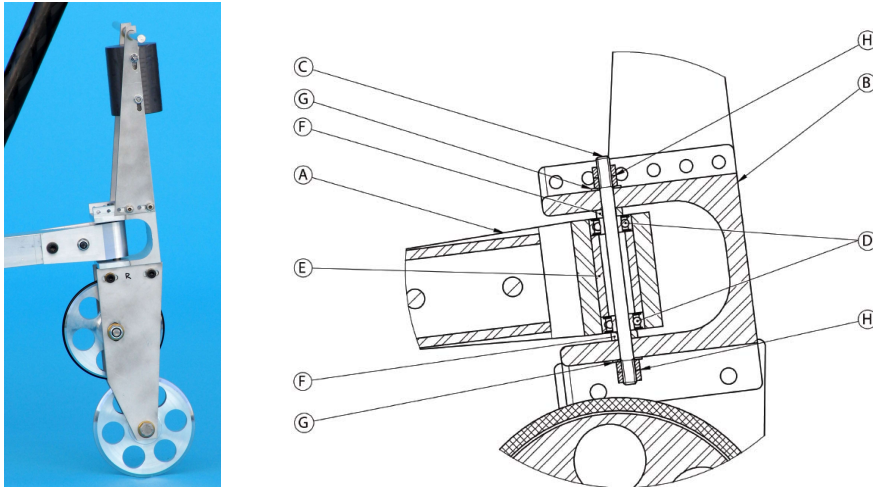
left*) Side view of the front assembly of the experimental TMS bicycle. *right*) Front frame and steering head cross-section. (A) Rear frame head bracket, (B) Front frame head bracket, (C) Dowel with threaded ends, (D) Bearings, (E) Glued bearing spacer, (F) Spacer, (G) Washer, (H) Nuts.
